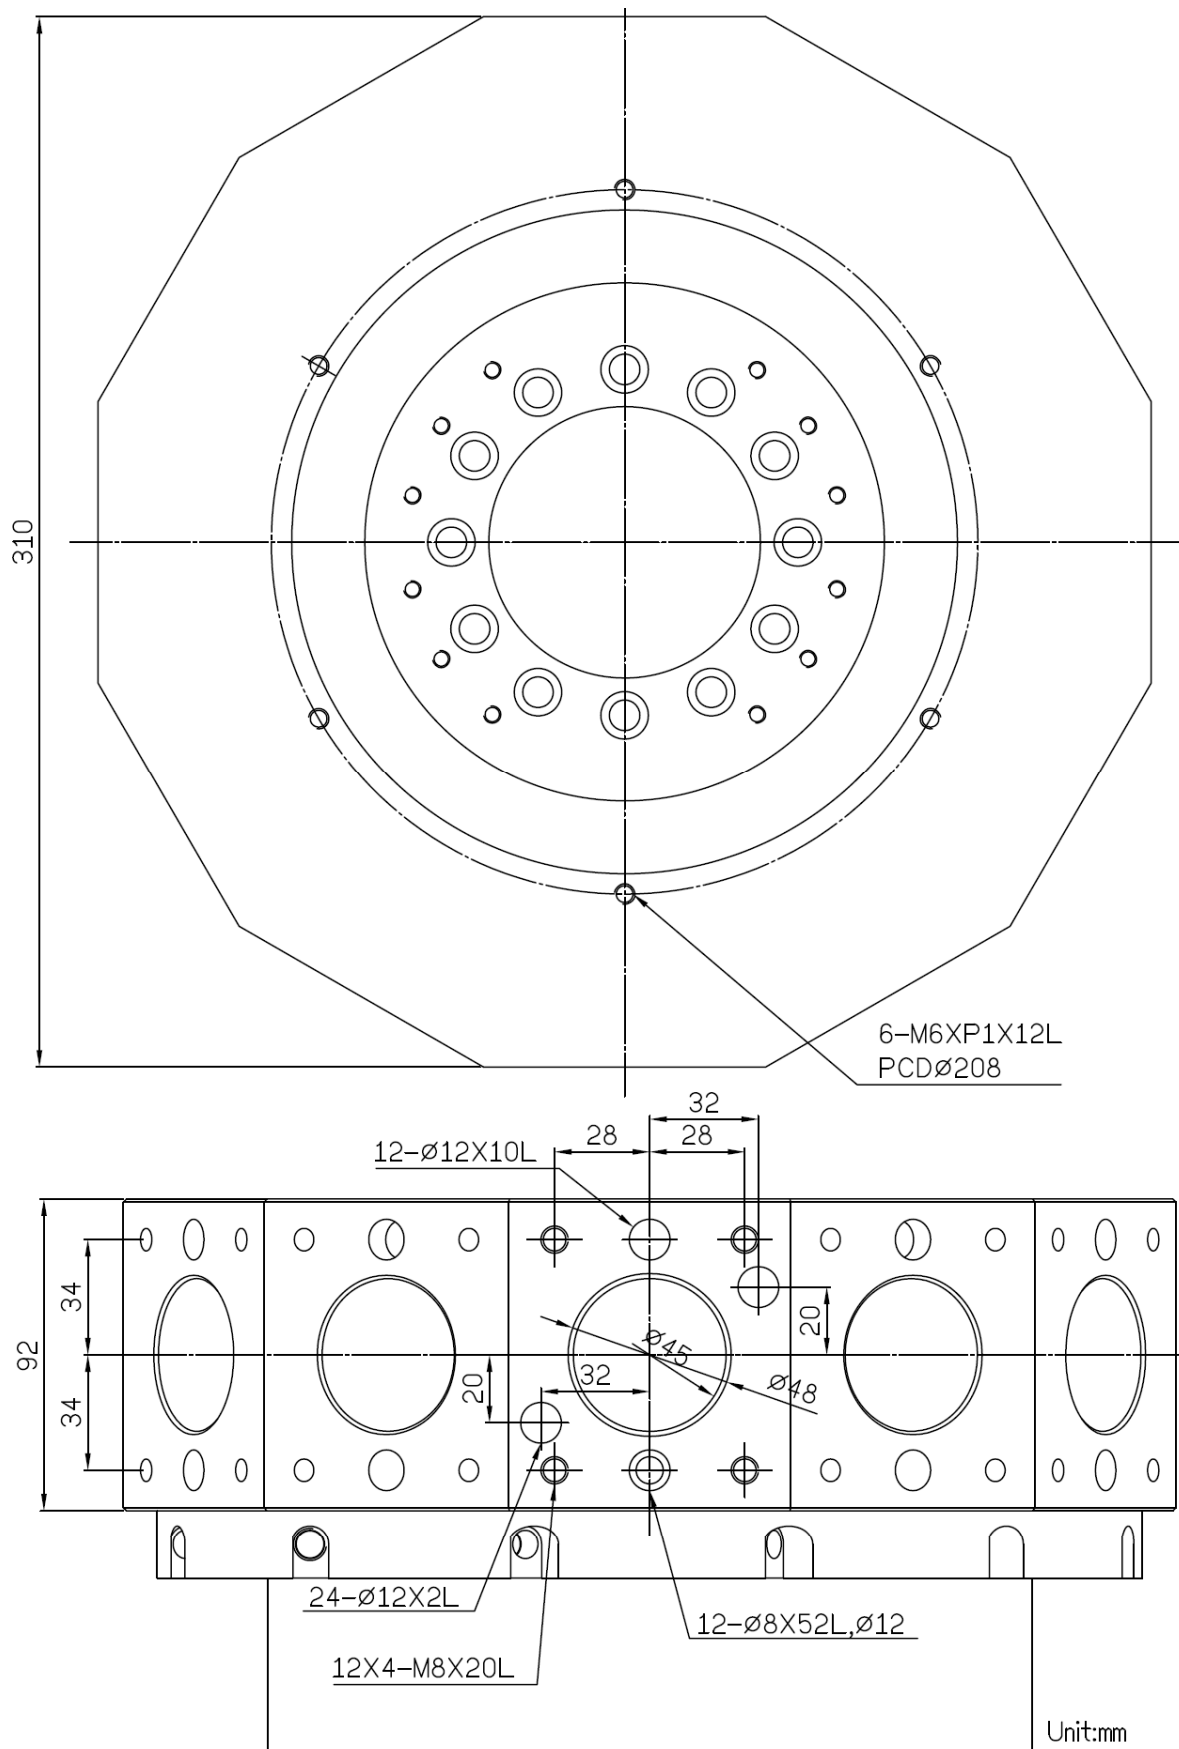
Turret head dimensional drawing for power turret (OP)
